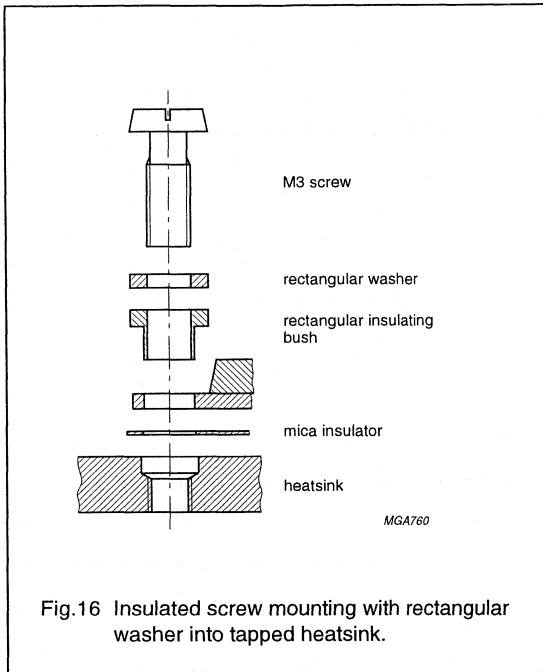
Insulated screw mounting with rectangular washer into tapped heatsink.
